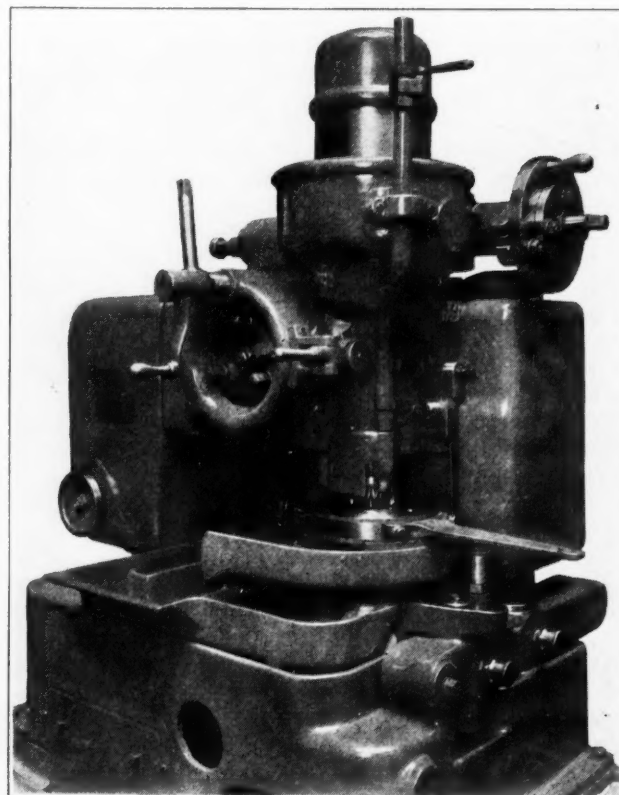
Close view of side-trimming arrangement on high-speed gear shaper, showing feed dial, stops, etc.
